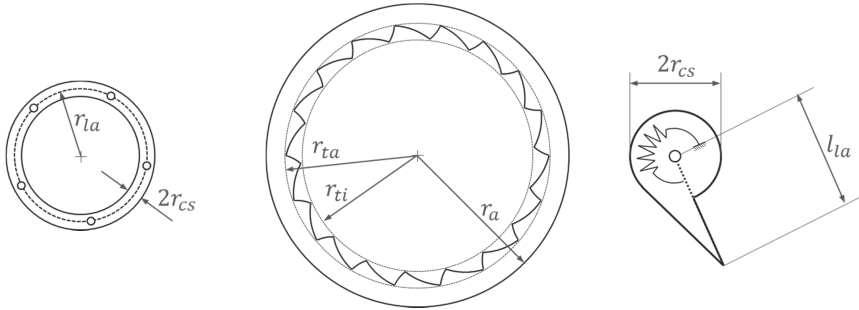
Overview on the dimensions of the Brake Arm Mount (left), brake Tooth Ring (middle) and Brake Spring arms (right).
